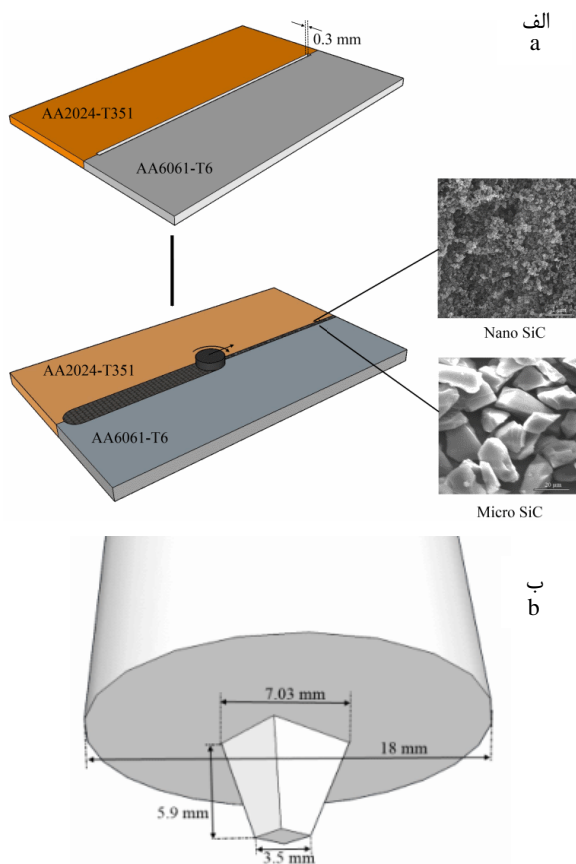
Schematic of a) the joint design and b) welding tool.
